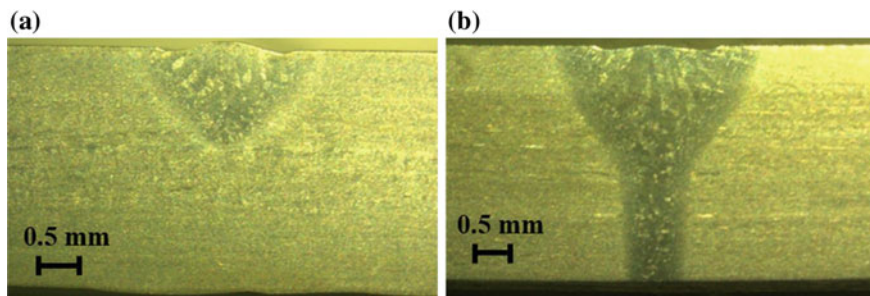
Cross section of weld samples a #2 and b #8 at constant weld speed of 1200 mm/min
